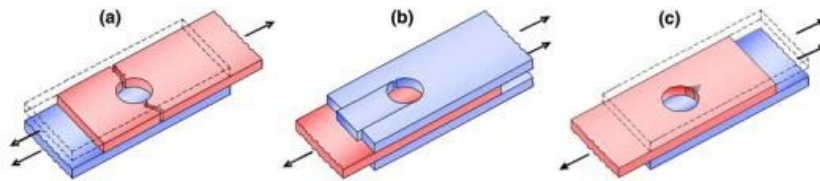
(a) Net-tension, (b) shear-out, and (c) bearing failure modes of composite bolted joints [31]
